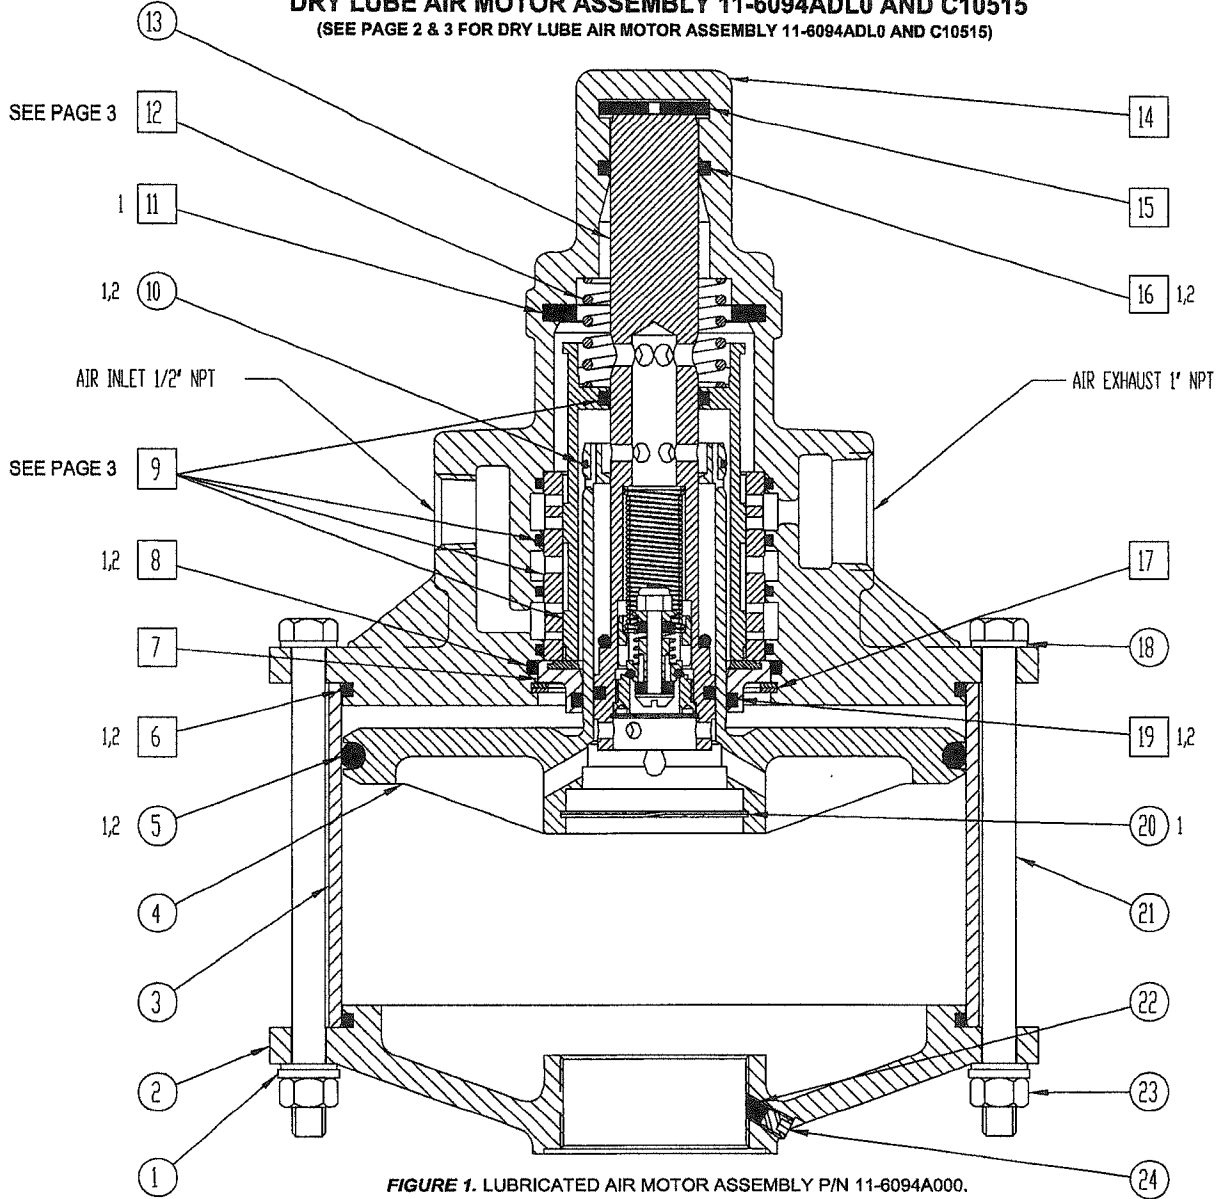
LUBRICATED AIR MOTOR ASSEMBLY P/N 11-6094A000.
